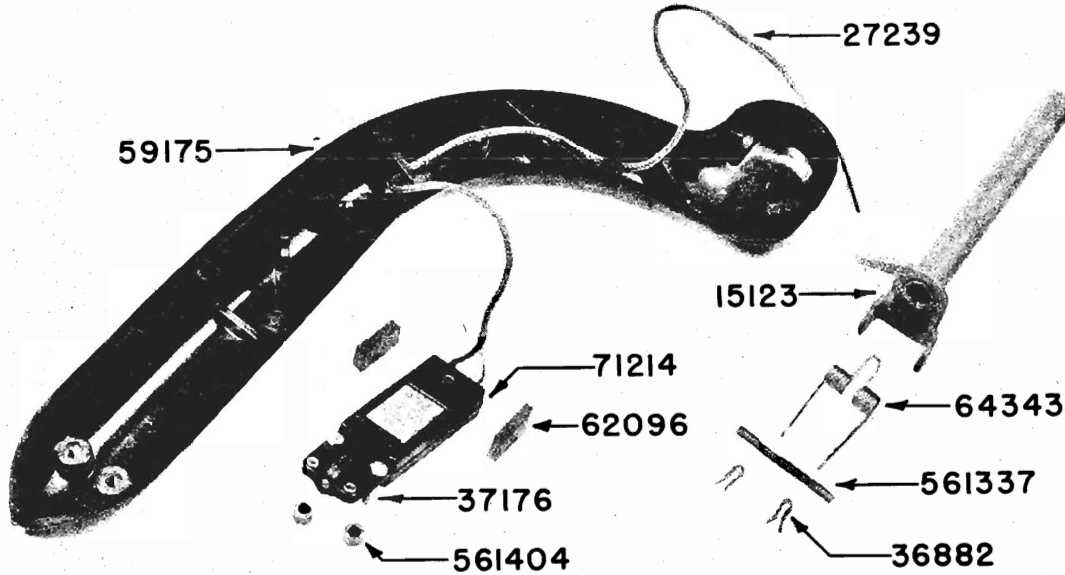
TONE ARM ASSEMBLY No. 13434
